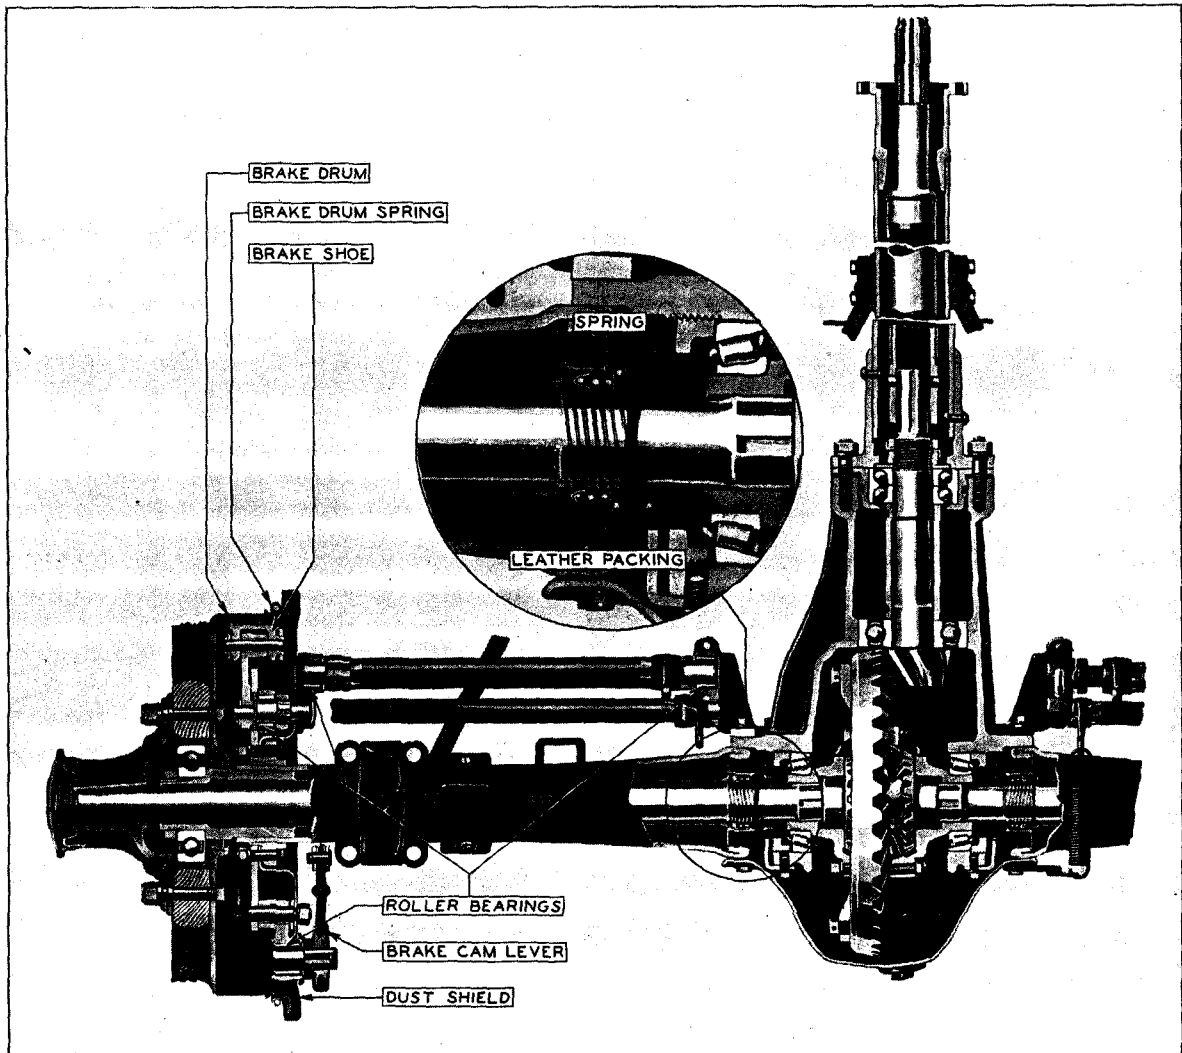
Sectional view of 328 rear axle, showing insert of new axle shaft packing.
